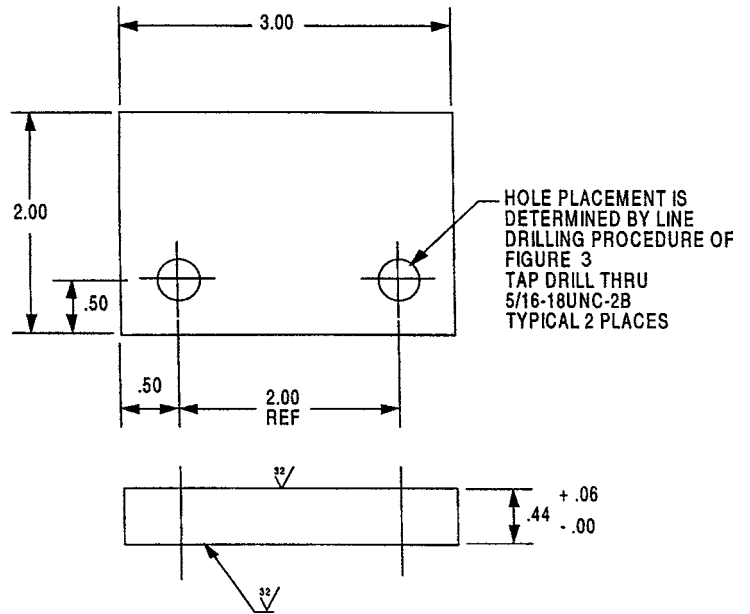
Support Fixture—Support Plate Details (Inch-Pound Version)
